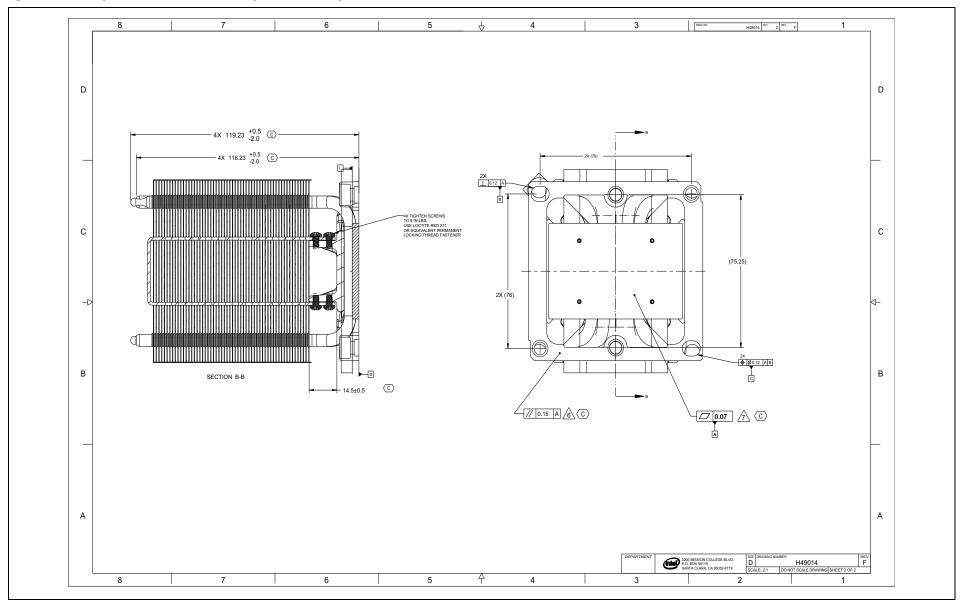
Square Tower Heatsink Assembly (Sheet 1 of 2)
